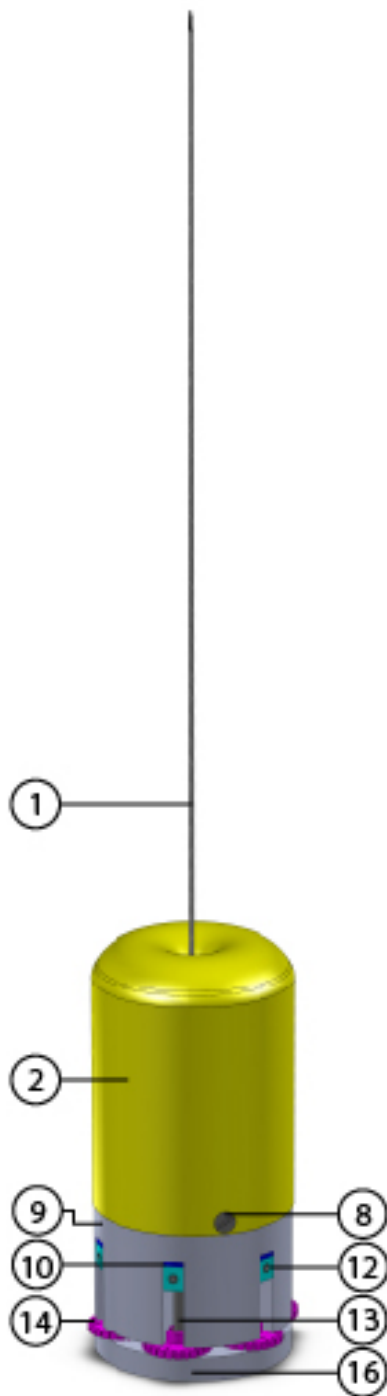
3D drawing of the control unit: (1) shrinking tube; (2) protection cap; (3) bolt M3x10; (5) Nitinol tube; (7) element; (8) screw M2x5; (9) body; (12) rectangular block; (13) lead screw M2x20; (14) wheel; (15) ring; (16) back plate; (17) screw M2x10.
